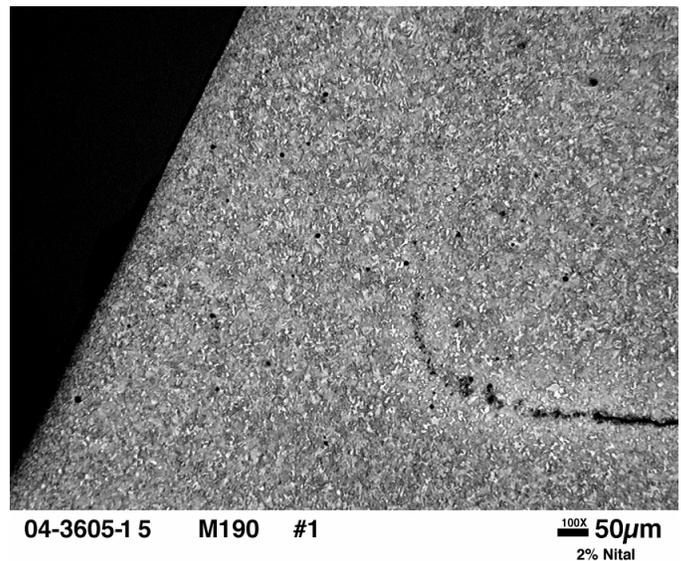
Close section view of the bonding interface region. M190 Steel, welding time: 2.1 sec
